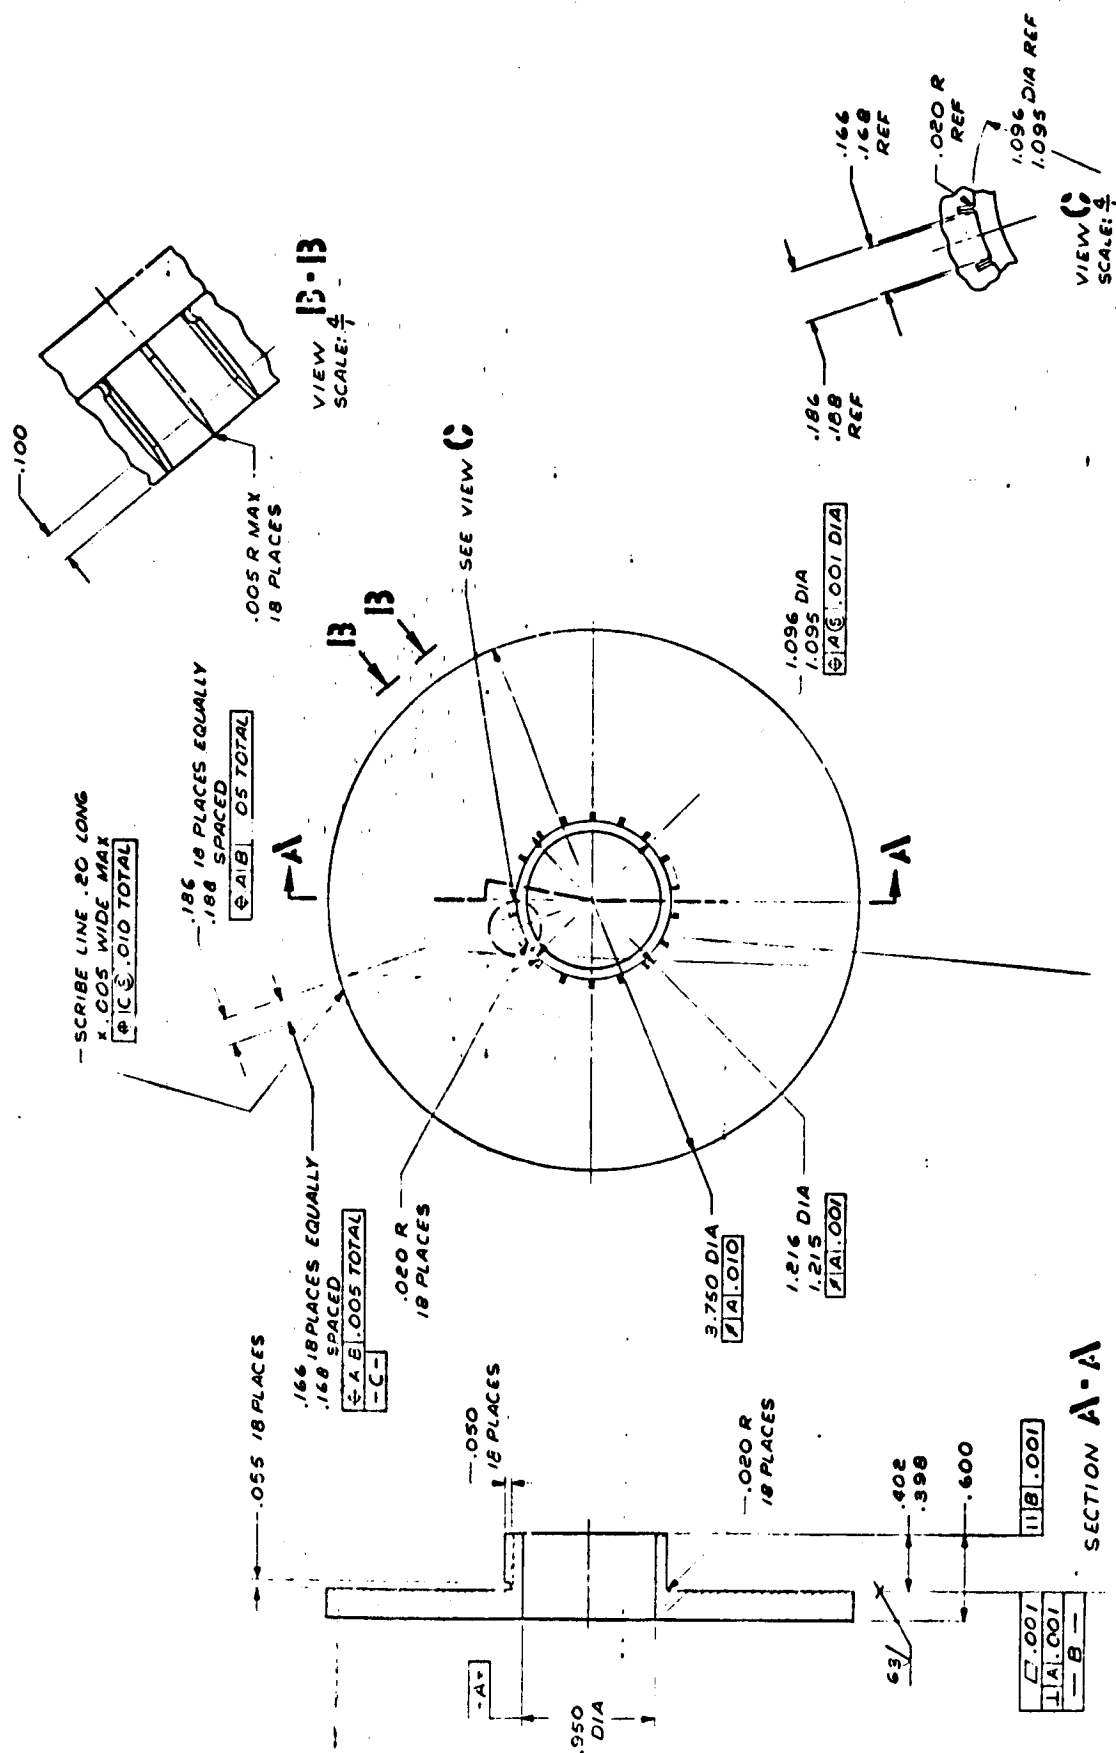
THICK SLOT FILM COOLANT INJECTOR - INNER RING
